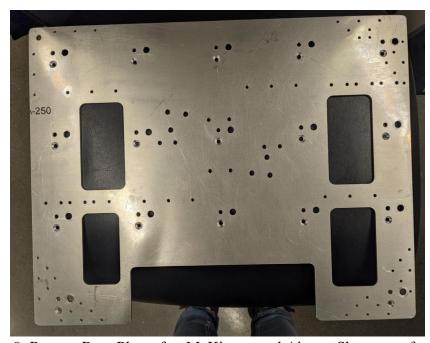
Bottom Base Plate after McKinney and Airport Shop manufacturing
